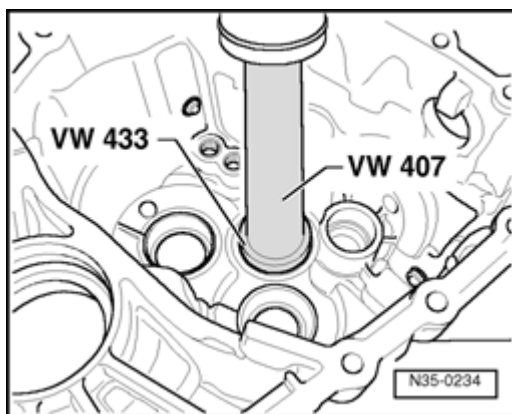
Pressing tapered roller bearing outer race into transmission housing
